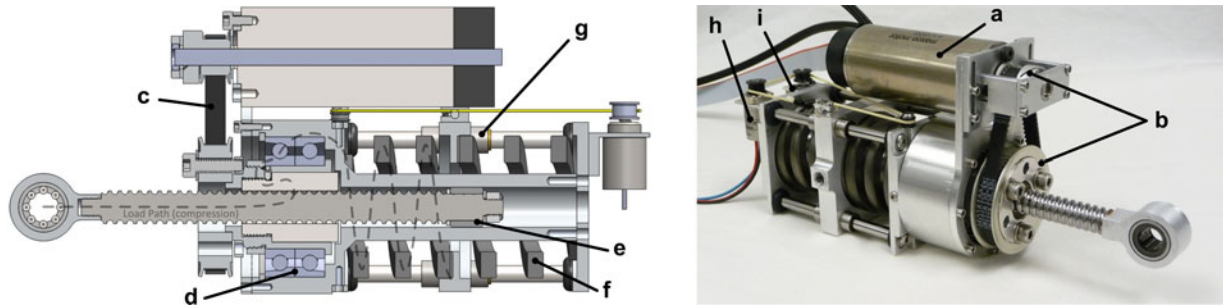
Cross section of the UT-SEA showing drivetrain components including (a) Maxon EC-4pole 30 200W BLDC motor, (b) 3:1 pulley speed reduction, (c) low backlash timing belt, (d) angular contact bearings, (e) piston-style ball screw support, (f) high compliance springs, (g) miniature ball bearing guides, (h) absolute encoder, and (i) incremental encoder. The compression load path is depicted as well.
